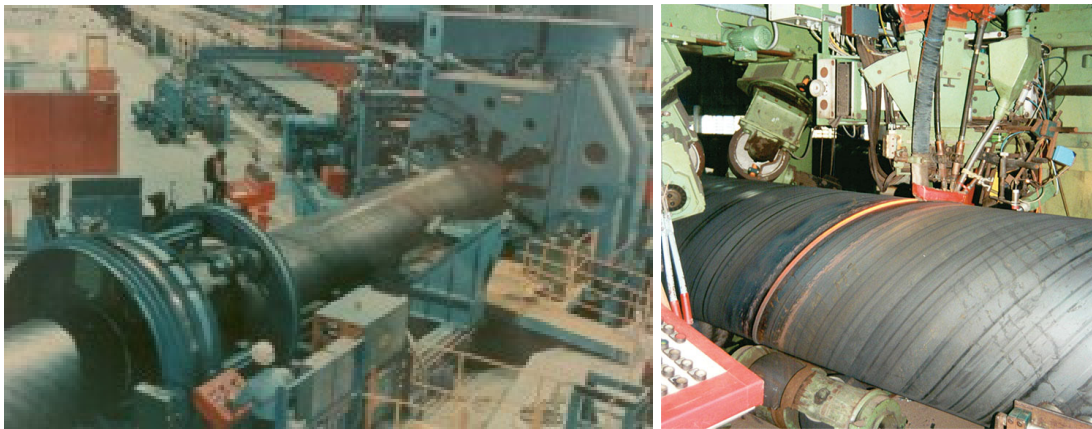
Spiral Welded Pipe Process
